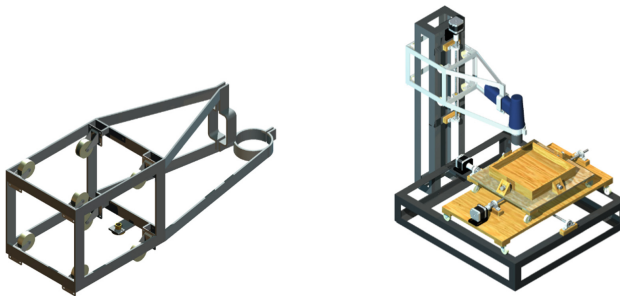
Machine Spindle Arm Design (right) and Concrete Engraving CNC (left)
